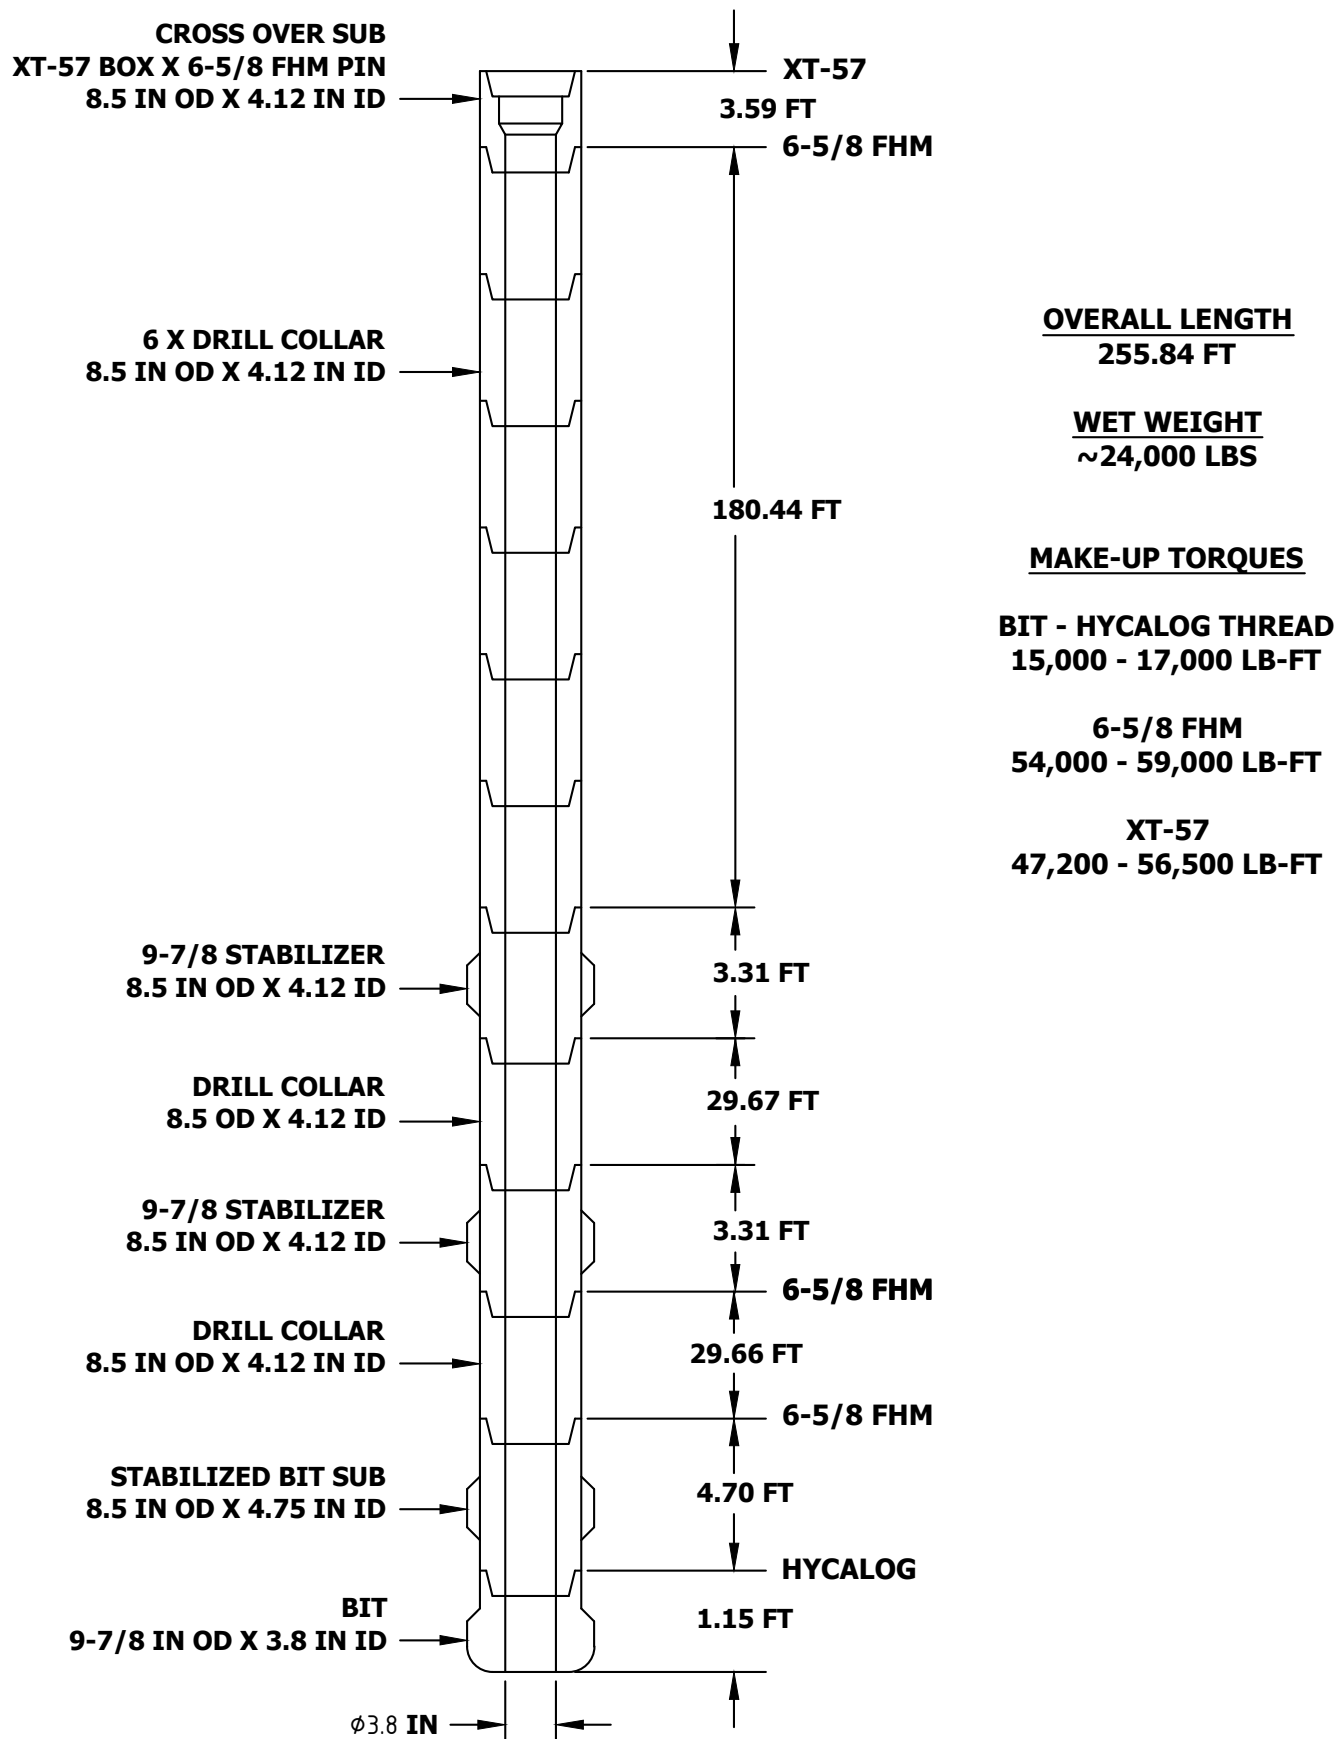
Hole H002 cementing bottom hole assembly (BHA) in the pressure coring tool with ball valve (PCTB) Cutting Shoe configuration (PCTB-CS) with six drill collars above the first stabilizer. Box and Pin specifications include XT-57, Full-Hole Modified (FHM), and HYCALOG. Sub assembly (SUB), inch (IN), pounds (LBS), feet (FT), foot-pounds (LB-FT), inner diameter (ID), outer diameter (OD).
